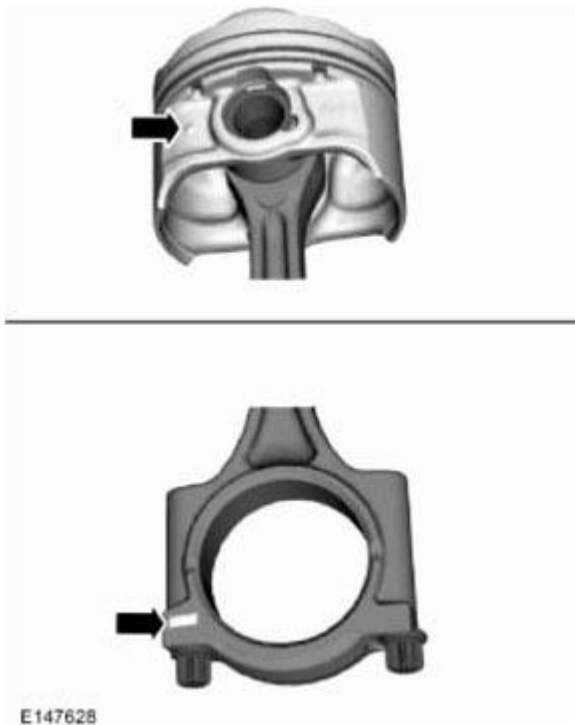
Locating Piston And Connecting Rod Orientation Mark
